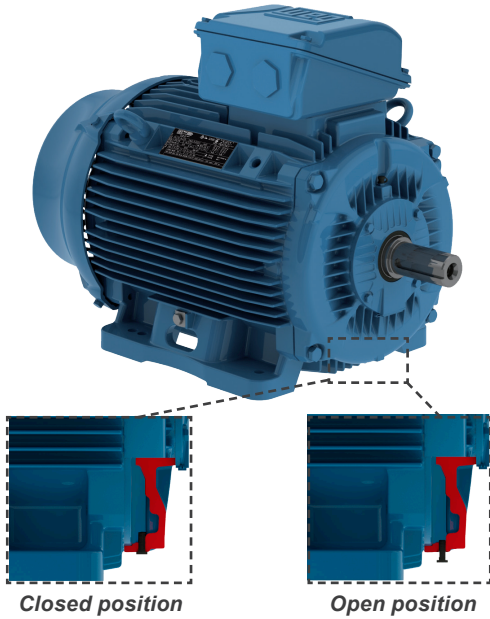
Detail of the rubber drain plug mounted in a closed and open position
